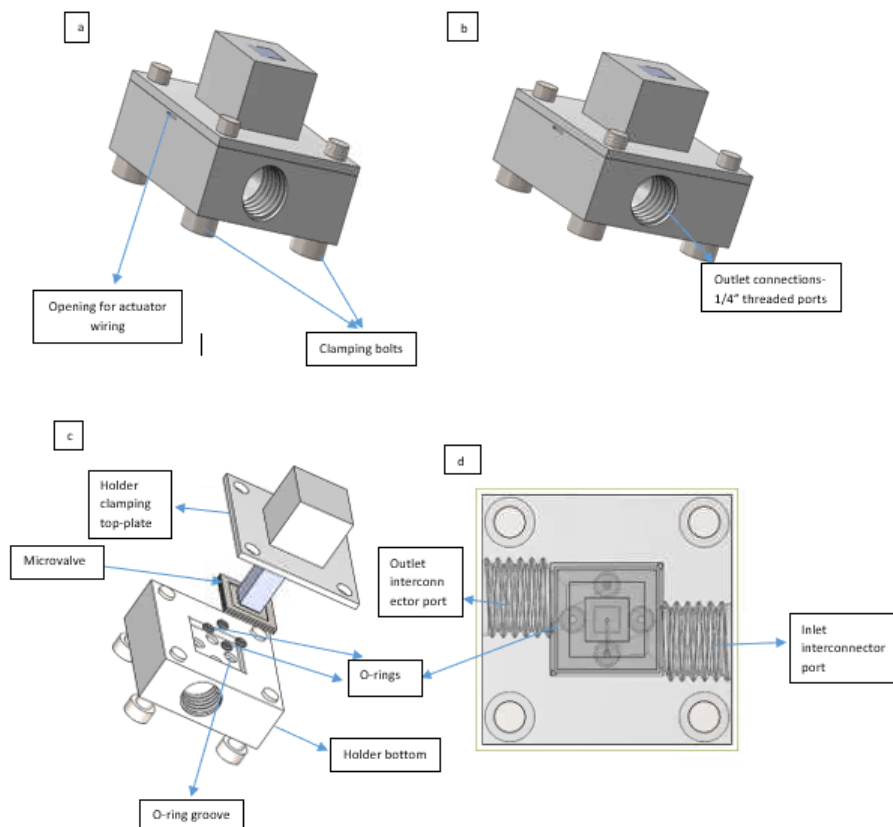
(a) Top isometric view of the microvalve in the 3-D printed valve holder (b) Bottom isometric view of the holder with threads to enable connections with other systems (c) Exploded view of the entire design along with holder and microvalve (d) Cross-section of assembled microvalve holder
